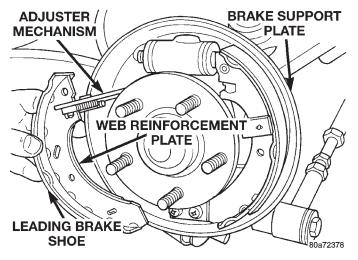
Leading Brake Shoe And Adjuster Mechanism
